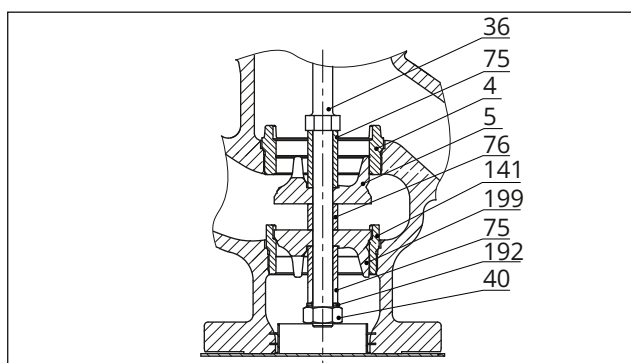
Valve in DN 65/NPS 2½ and larger · Mixing valve
